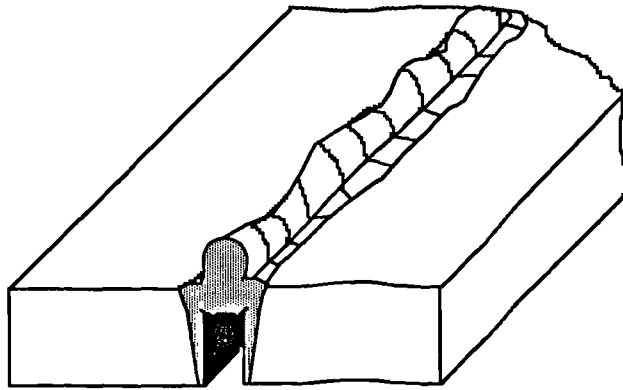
A schematic representation of the appearance of a humping weld bead.
